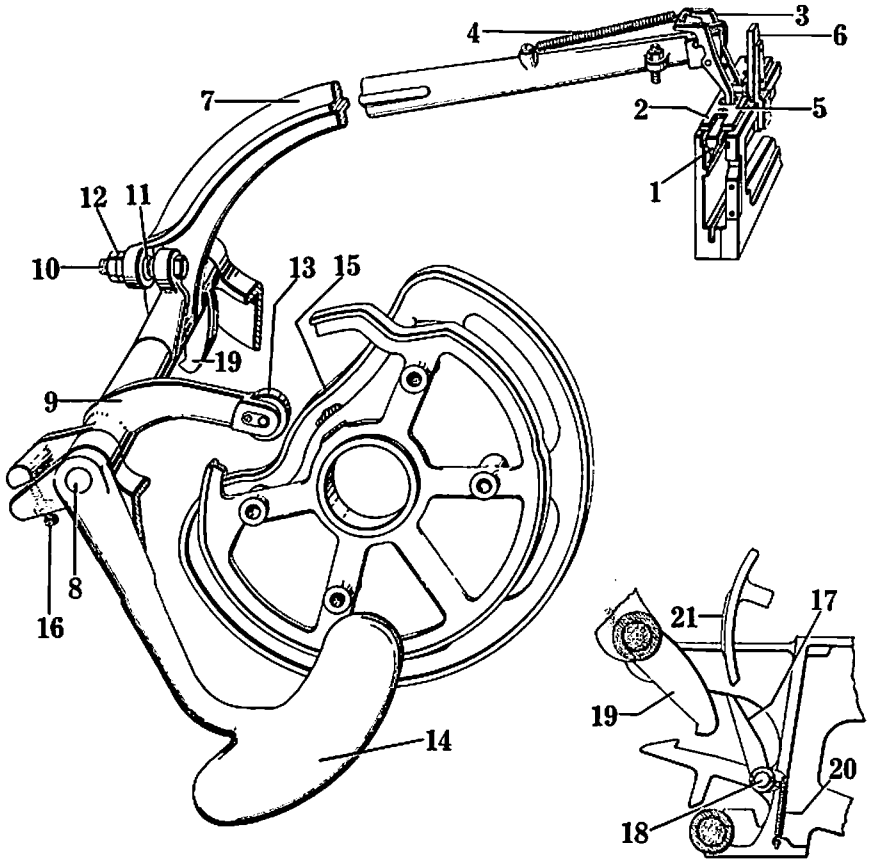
Perspective View of the Second Elevator and Related Parts in Assembly. The second-elevator safety pawl is shown in the detail drawing.
